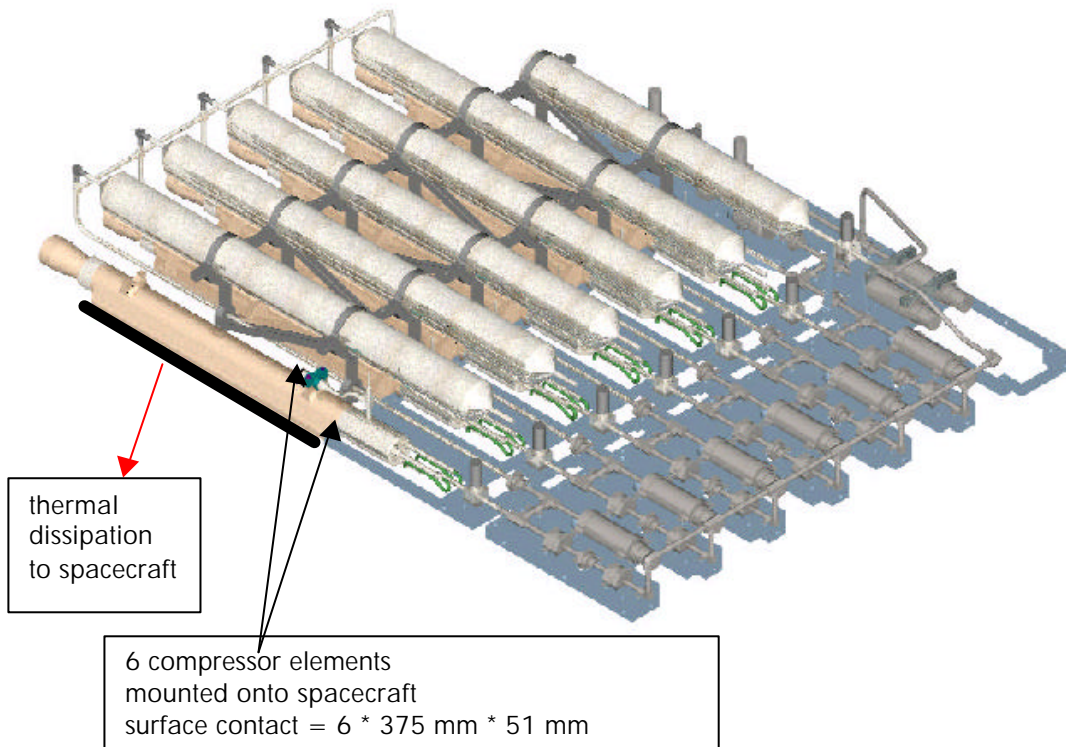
COMPRESSOR PHYSICAL ASSEMBLY (JPL DRAWING)
